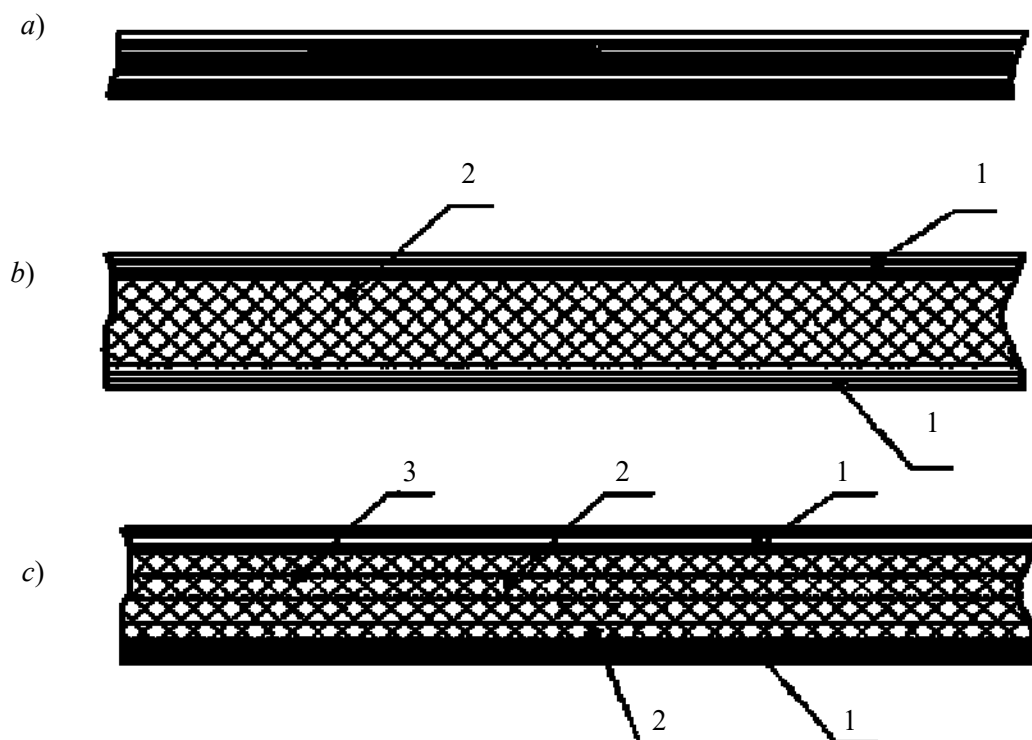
Structural schemes of the hull shell (decks plating and bulkhead plating) manufactured of FRPs:
